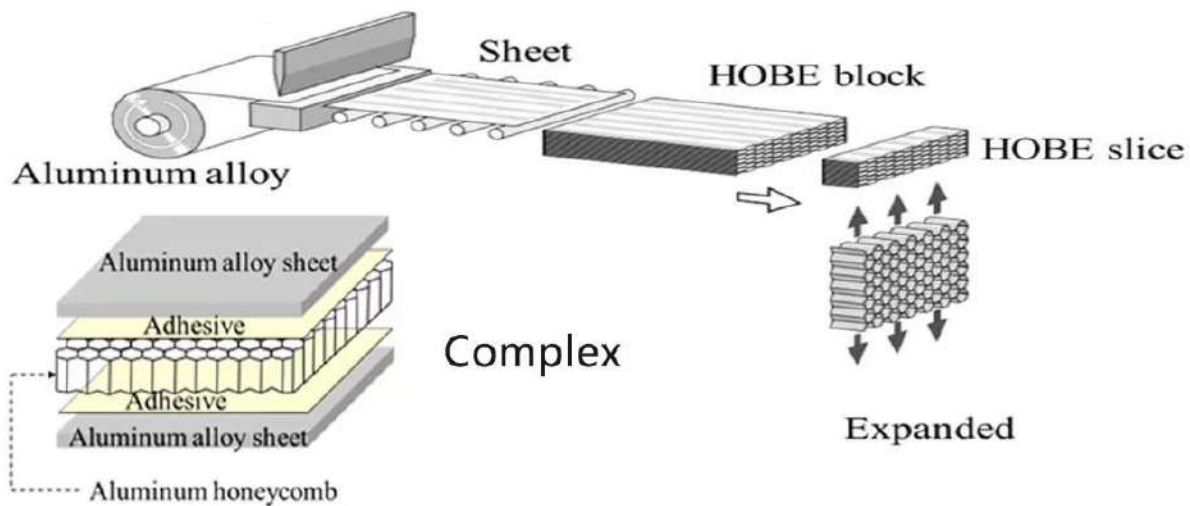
Expansion honeycomb core manufacturing method [4]
